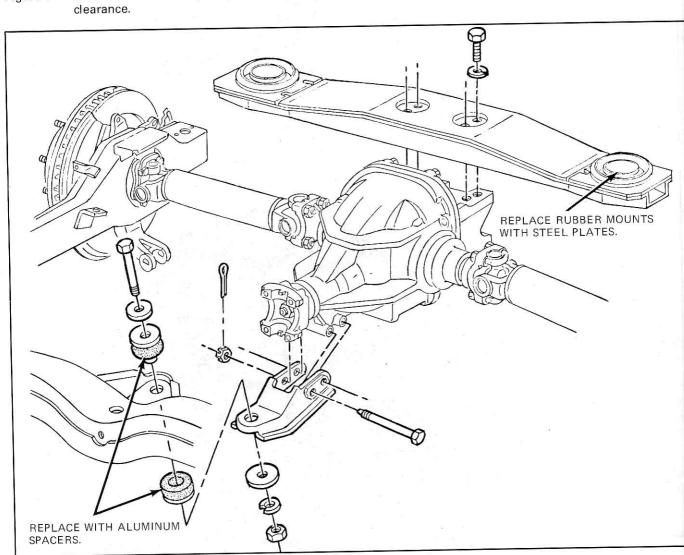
Replacement of rubber parts with solid plates and bushings.
